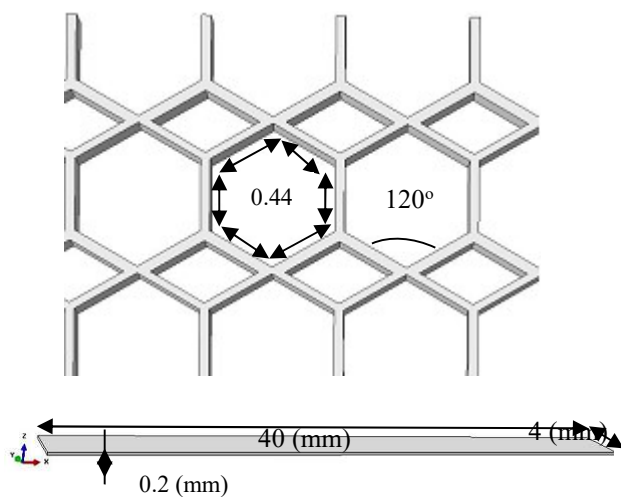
Geometrical dimensions of (a) the core and, (b) the face sheets in a composite honeycomb sandwich beam.
